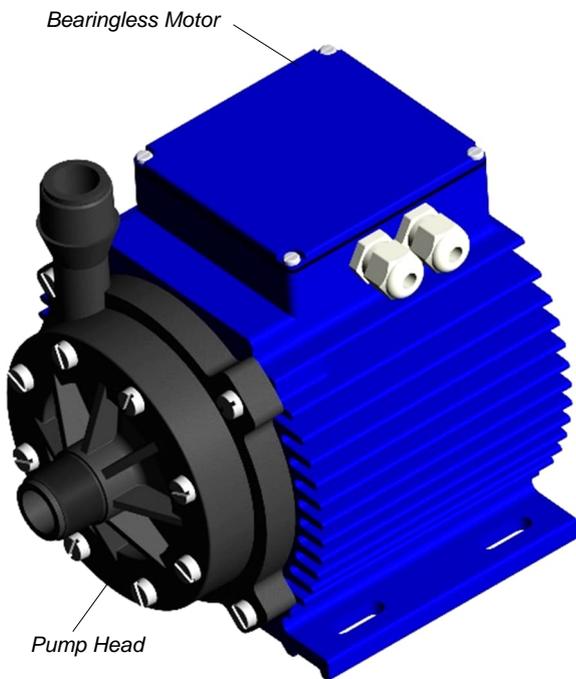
Bearingless pump motor and pump head LPP-2000.2 (PP)
